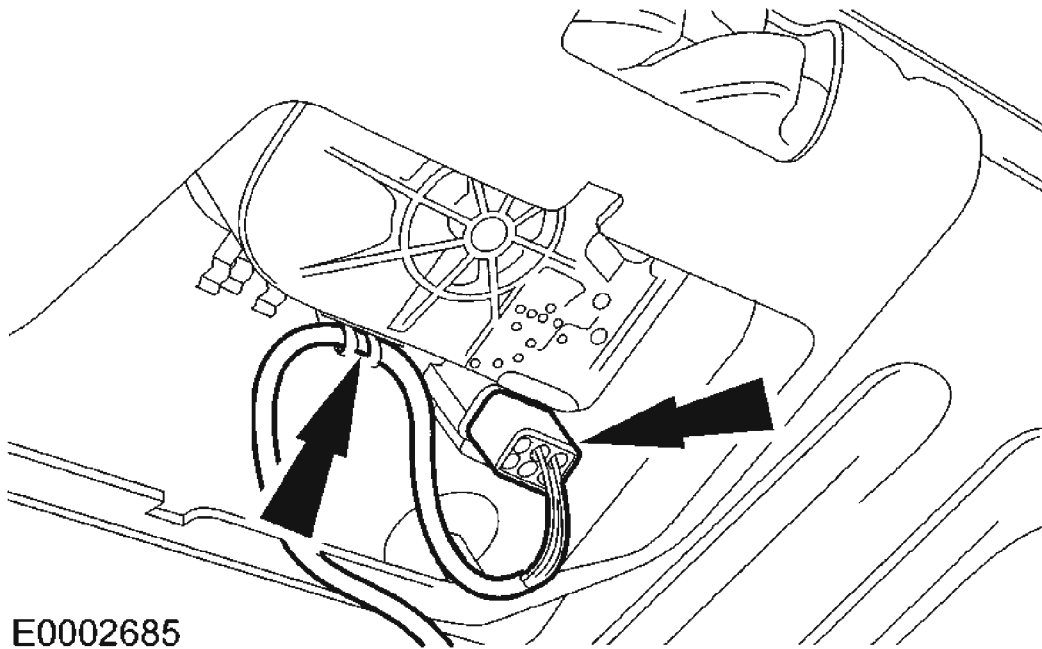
Disconnecting And Detaching Liftgate Latch Electrical Connector
